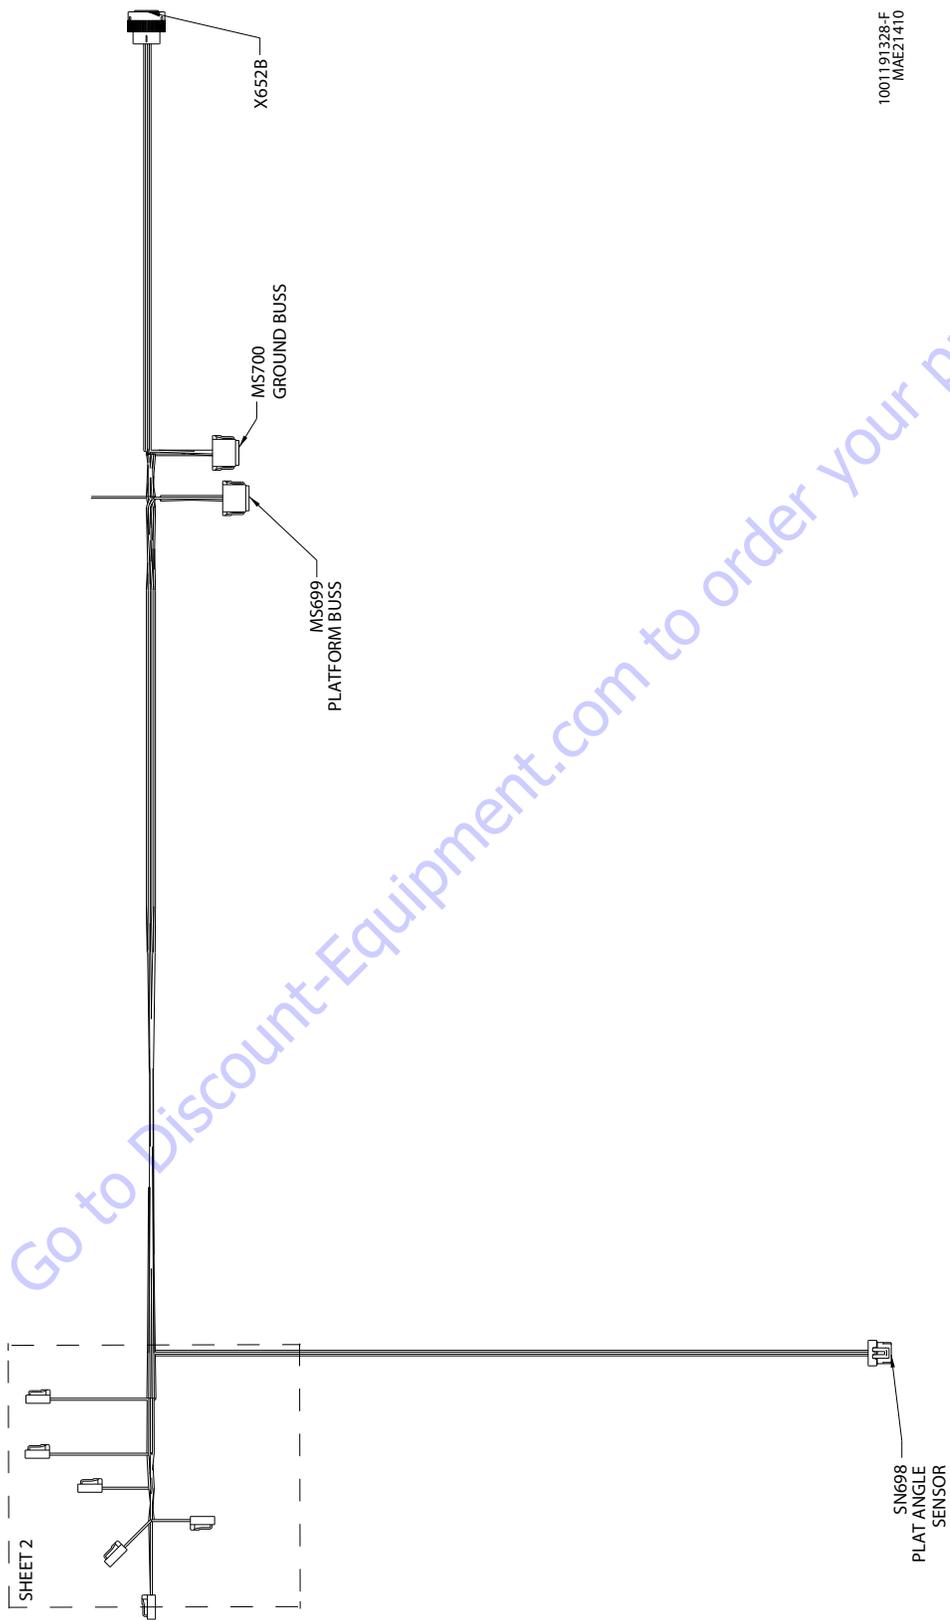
Platform Valve Harness - Sheet 1 of 2
